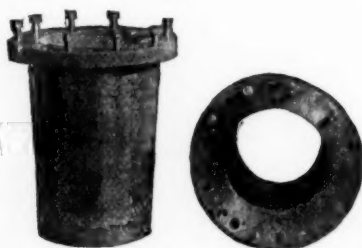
DETAILS OF ARMATURE BEARINGS.
